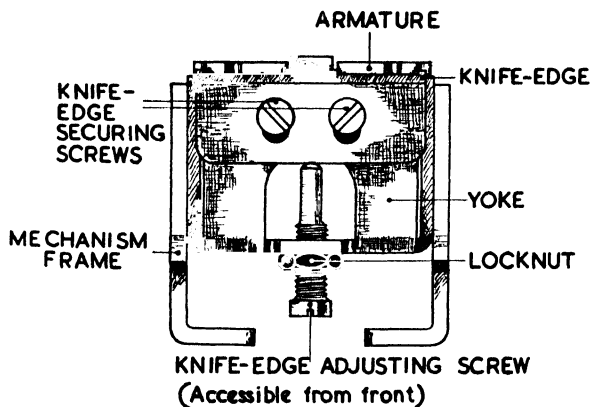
MOUNTING AND ADJUSTMENT OF ARMATURE
